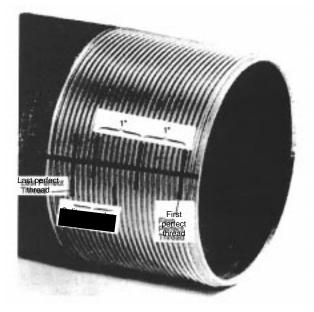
Pin End Thread on Which is Drawn a Longitudinal Line to Facilitate Inspection—Coupling Longitudinal Line is Drawn in Similar Manner
